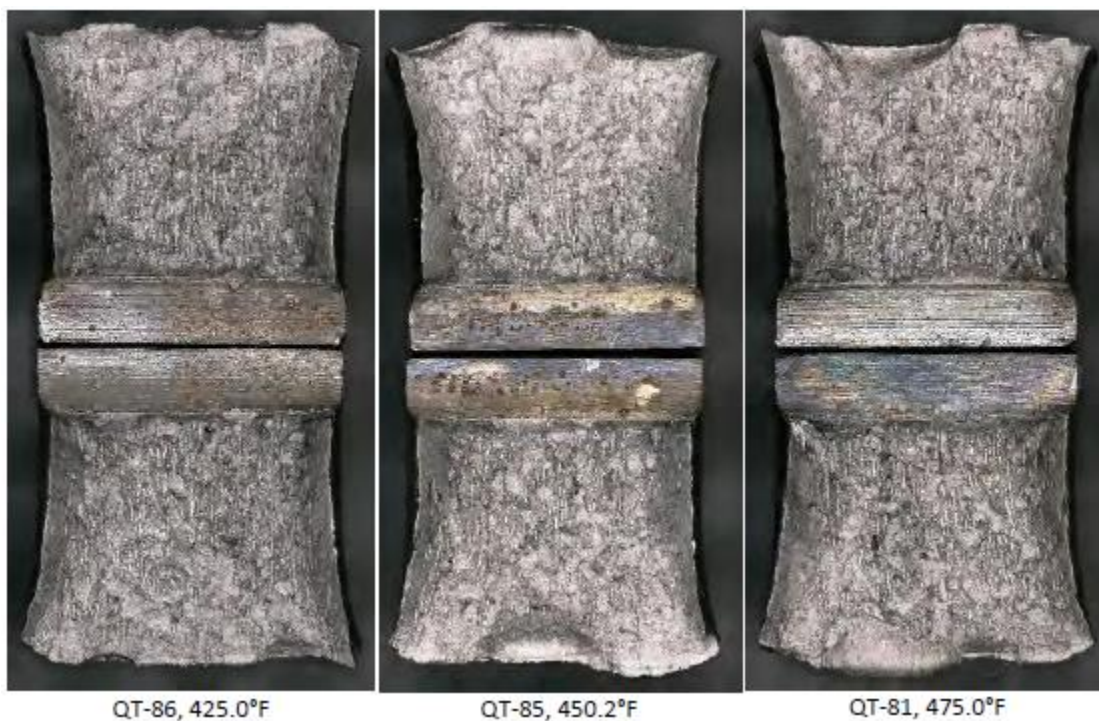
, (Cont'd). Photographs of Charpy Impact Specimen Fracture Surfaces, Base Metal Plate, Heat No. B4197-2, Transverse (TL) Orientation
